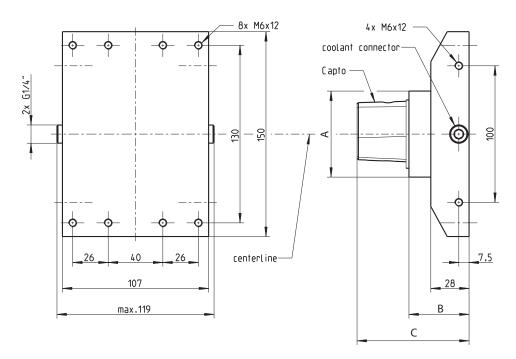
Machine adapter with Capto C... for disk-type turret with Coromant Capto clamping unit, Type 9129AC...
